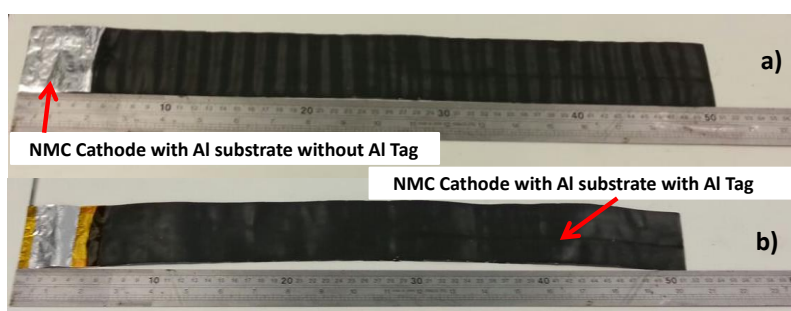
NMC cathode coated on Al foil; (a) without Al Tag and (b) with Al Tag welded ultrasonically
